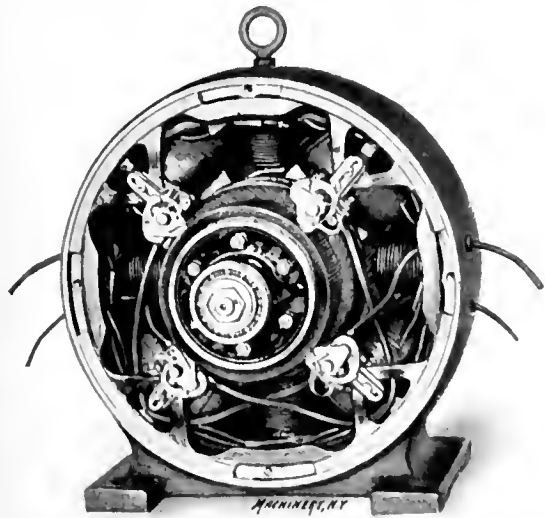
Motor with Front Frame Removed, showing Ball Bearings
